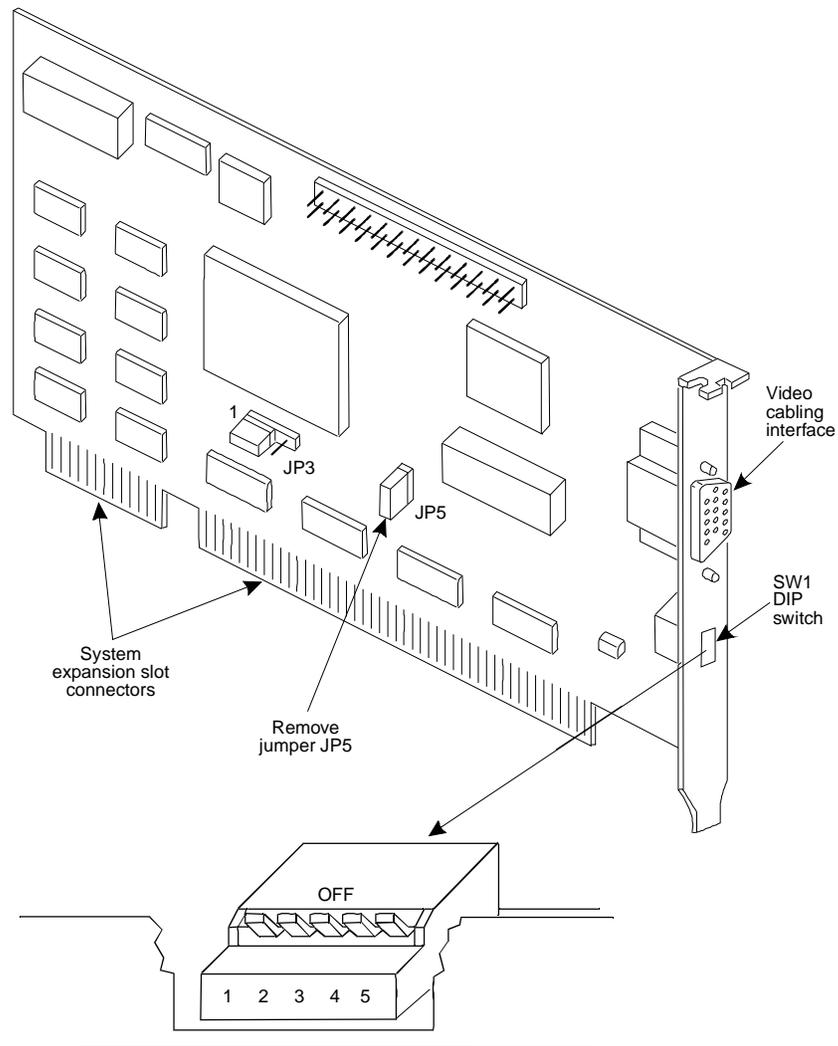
Video Controller Card with Switch Settings – Version 2
